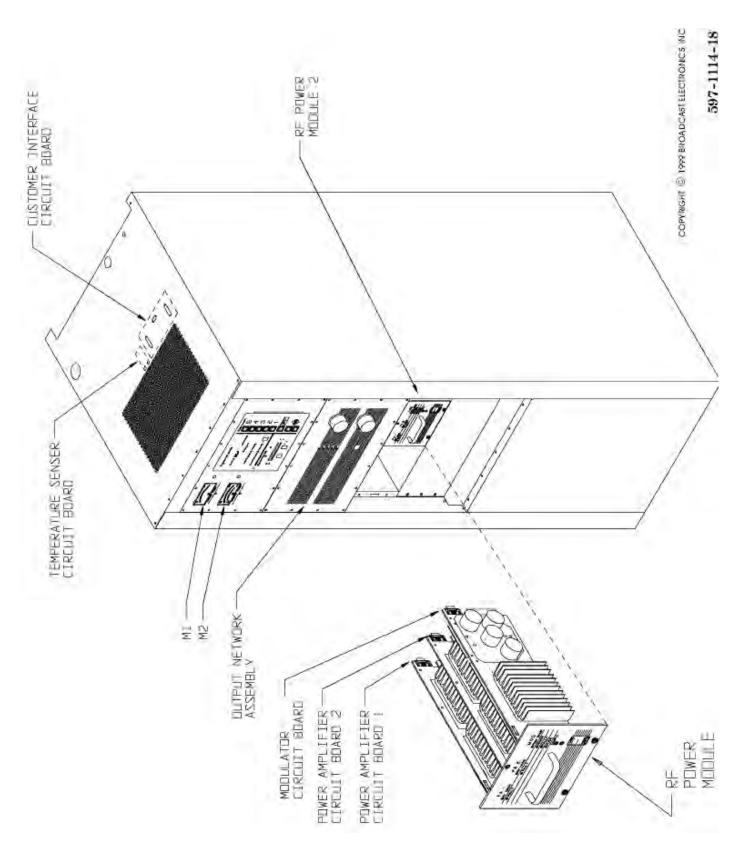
AM-2.5E COMPONENT LOCATOR (SHEET 1 OF 3)
